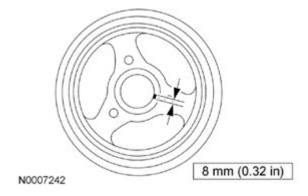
Identifying Crankshaft Pulley Sealant Applying Area On Woodruff Key Slot Courtesy of FORD MOTOR CO.
